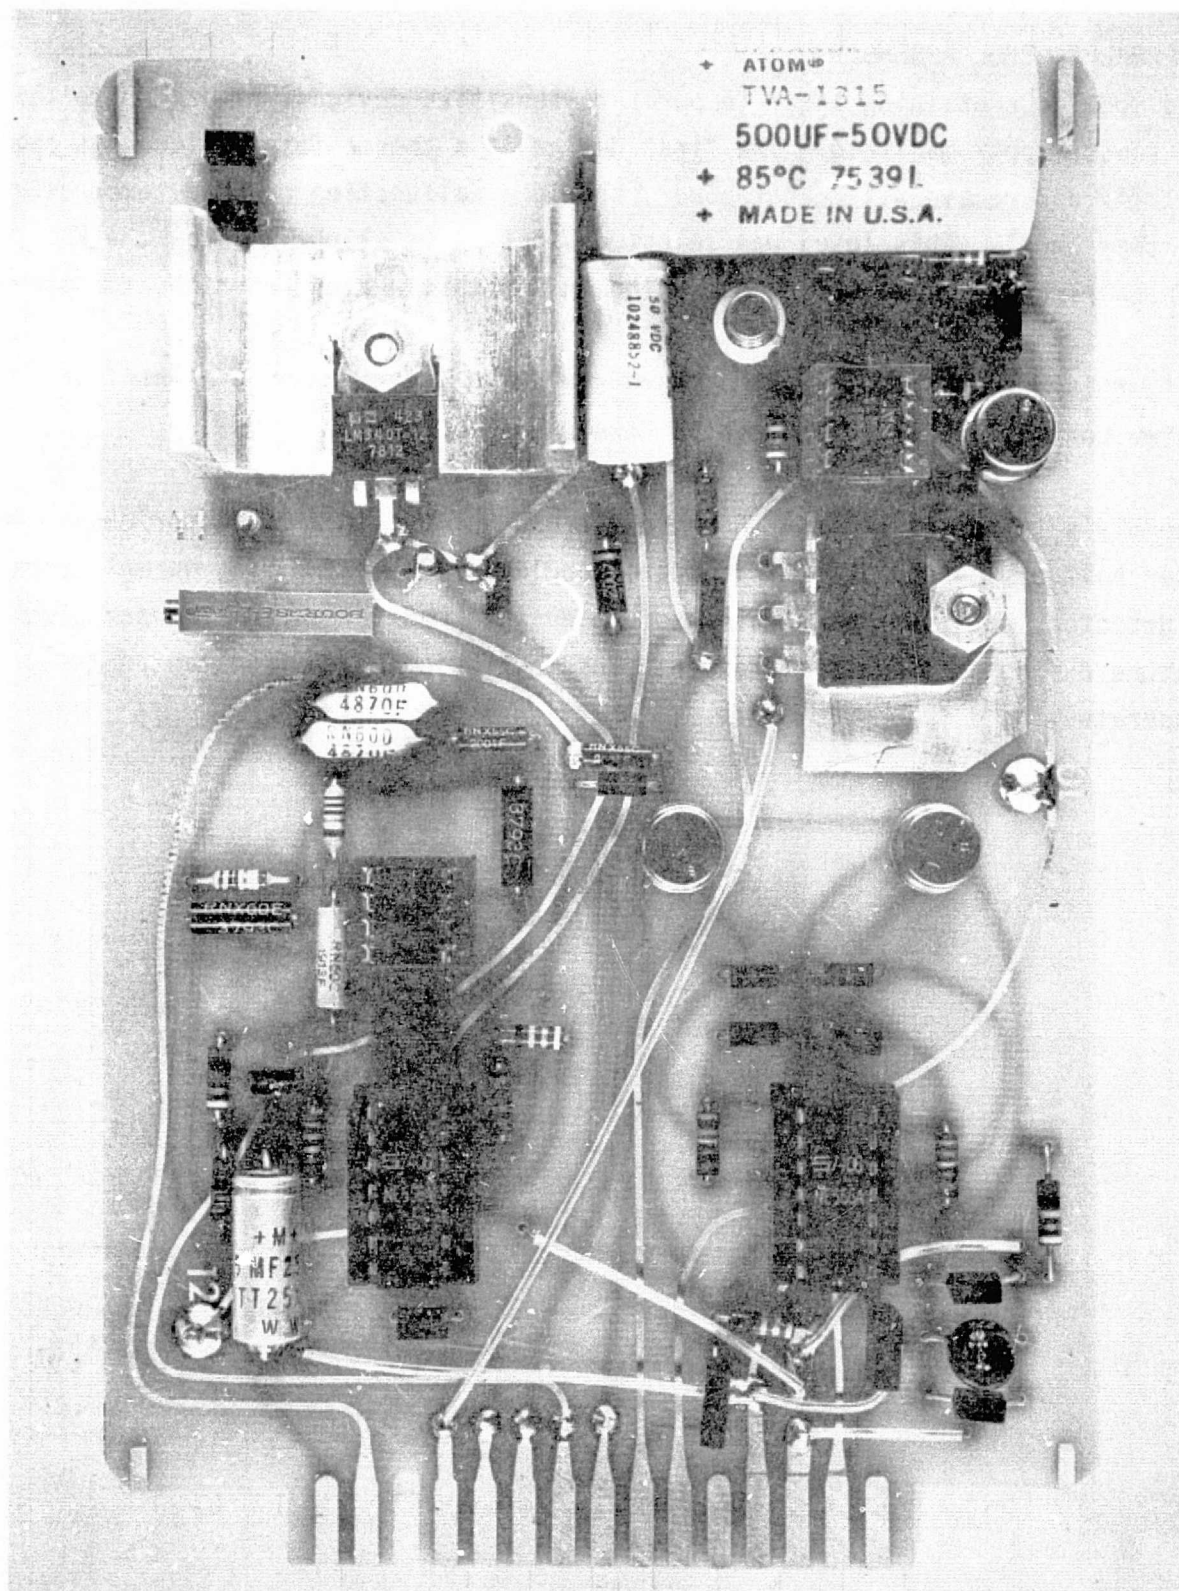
PRINTED CIRCUIT CARD 3
